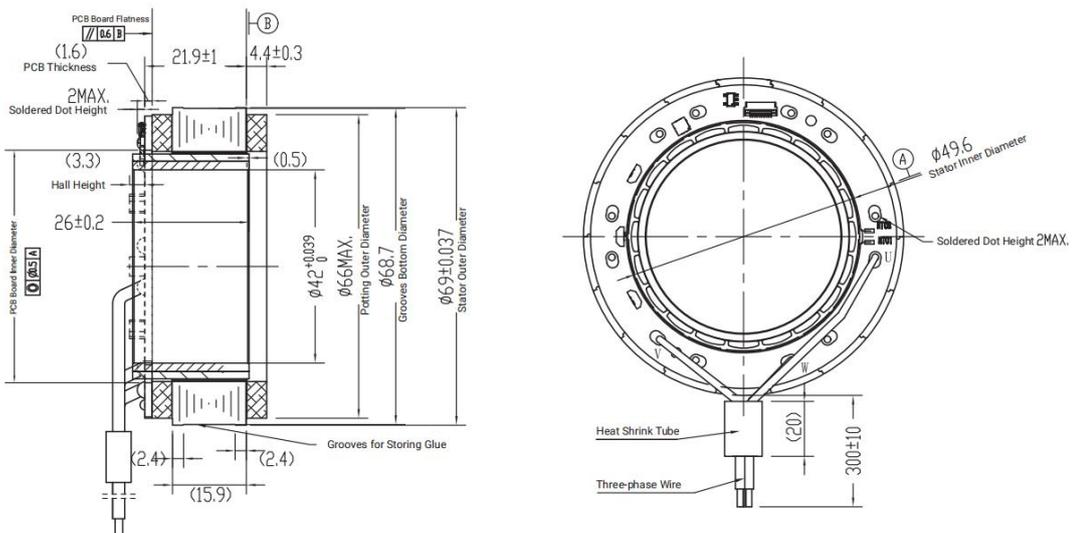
RMD-FL-70-16-400 appearance dimension drawing
